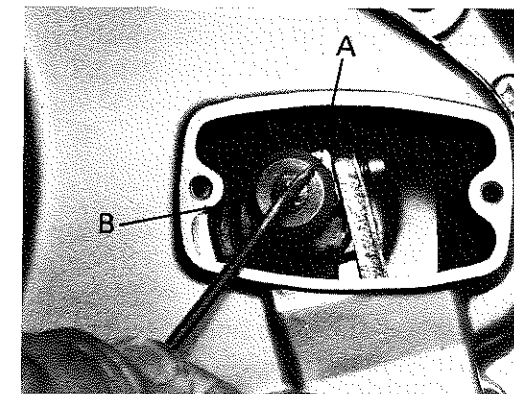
View showing shifter sliding pin (A) engagement with control shaft spool (B).
